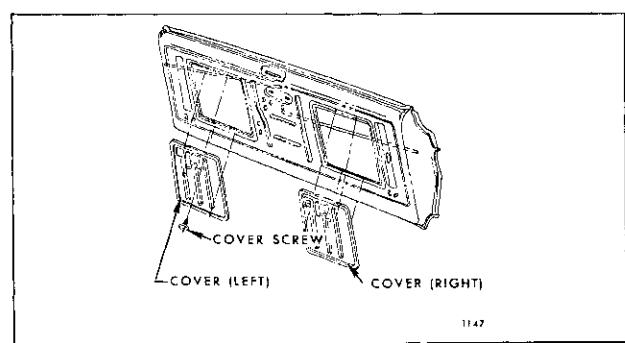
Tail Gate Inner Panel Access Hole Covers
